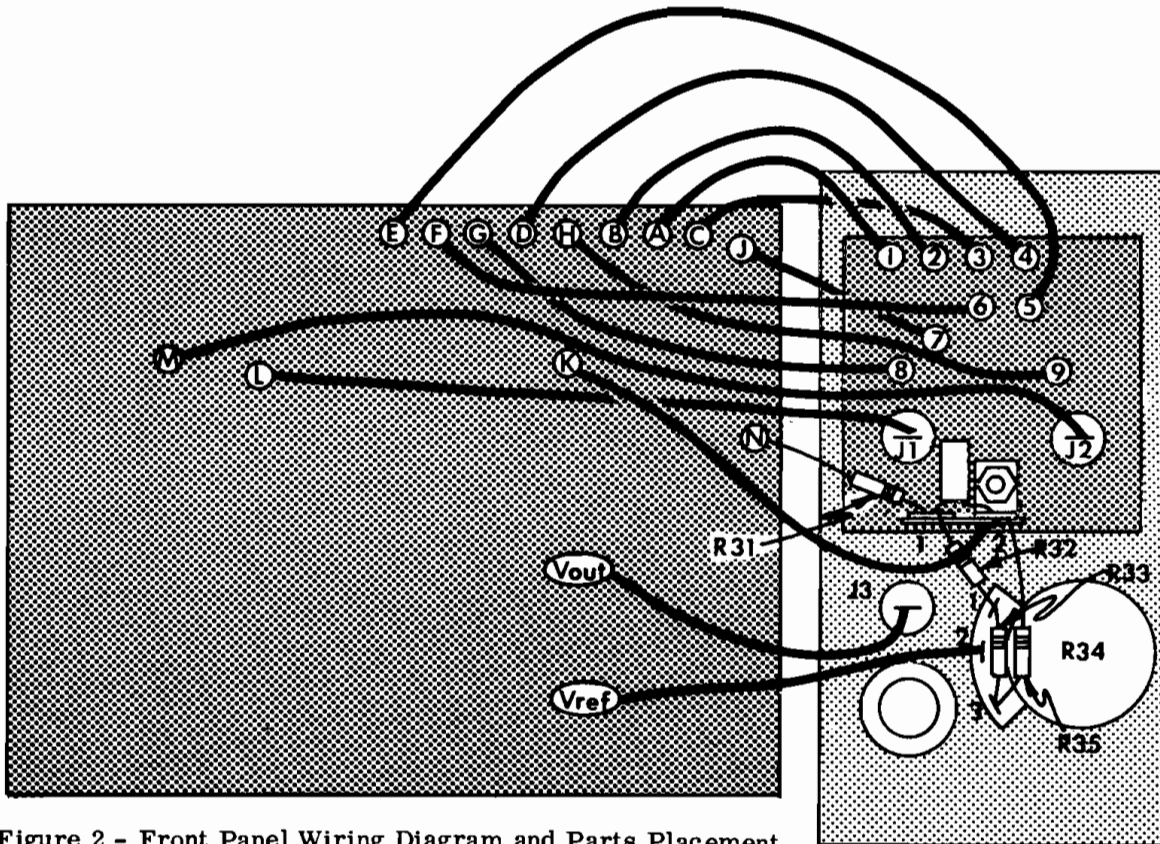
Front Panel Wiring Diagram and Parts Placement
